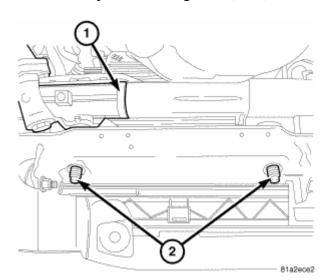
Identifying Power Steering Lines & Gear Courtesy of CHRYSLER LLC
